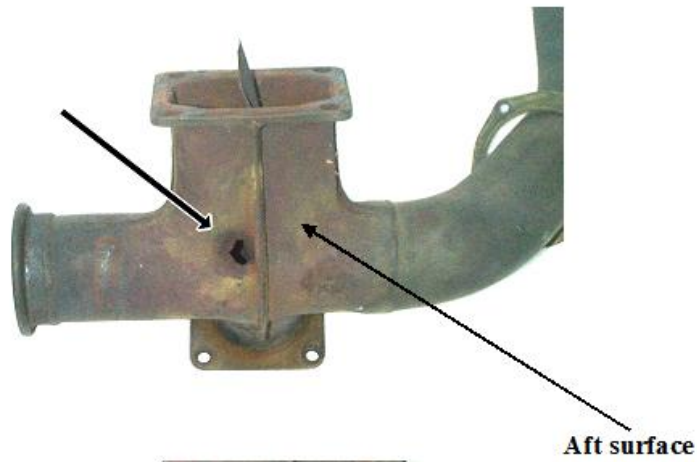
Wye failure and material blowout. Failed wye to waste-gate attach flange.
